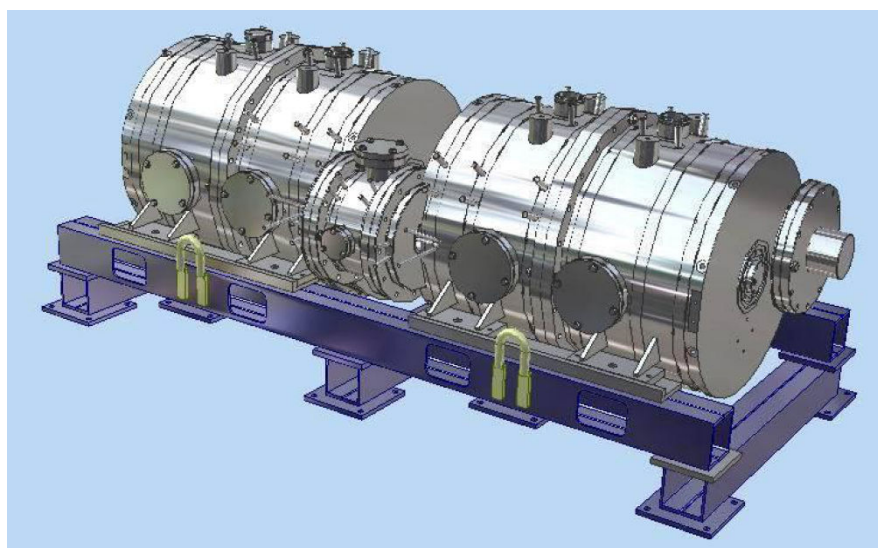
3D view of the CCDTL prototype.
